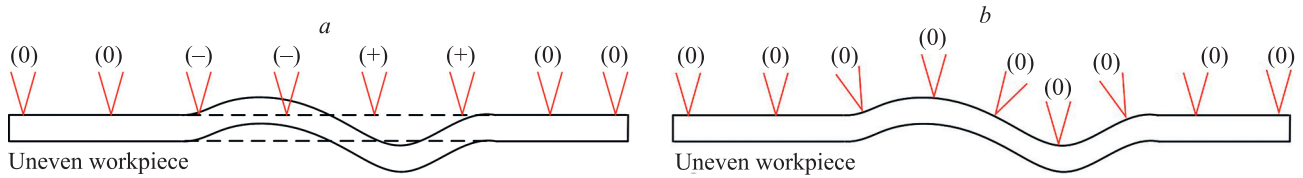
Position of the beam waist on uneven workpieces: if the laser head is not adaptive to the surface of the workpiece (a); if the laser head is adaptive to the surface of the workpiece (b)
